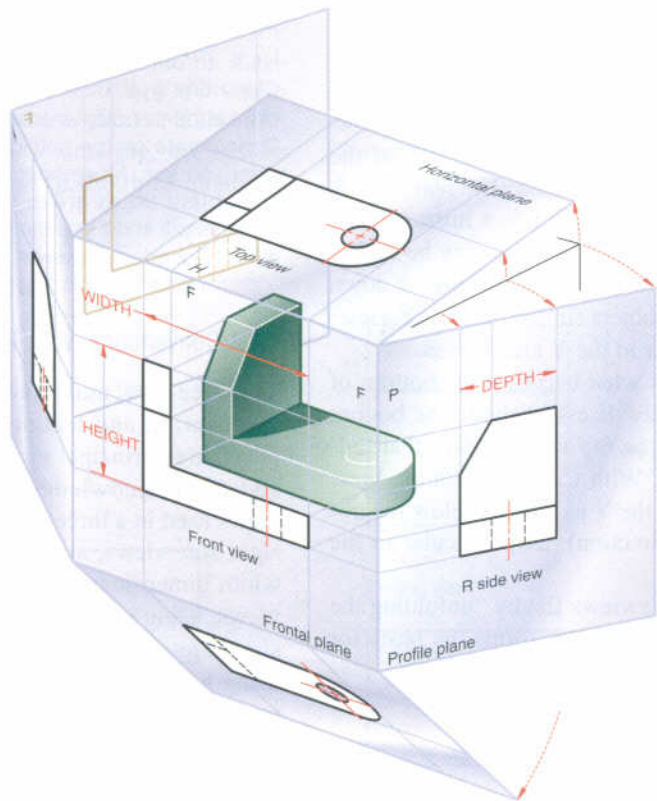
Unfolding the Glass Box to Produce a Six-View Drawing
